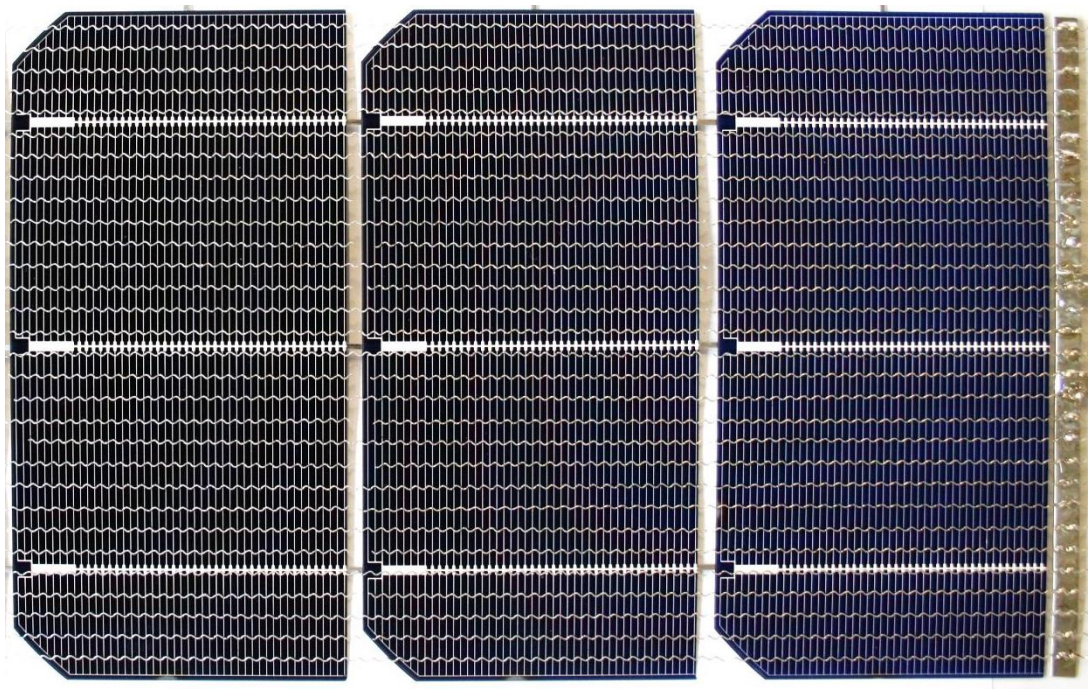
Solar cell string including three half solar cells (size: 156 mm \times 78 mm), each connected by 30 wave-shaped wires on the front side and three ribbon interconnectors on the rear side. On the front side the wires were soldered on the finger grid, whereas on the rear side the contact pads are connected by ribbon interconnectors [135].
